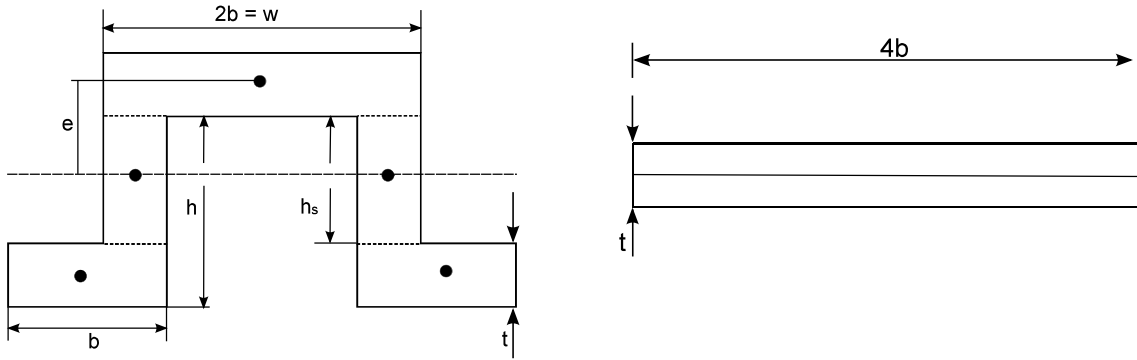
figure of a beaded cross section (left) and an unbeaded cross section (right).
